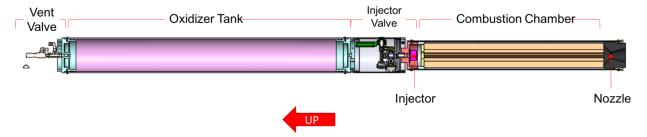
Kismet engine cross section. A sectional view of the Kismet engine, including detail of the vent valve section, oxidizer tank, injector valve section, injector, combustion chamber, and nozzle. Exterior combustion chamber airframe section and electronics assemblies are not shown.
